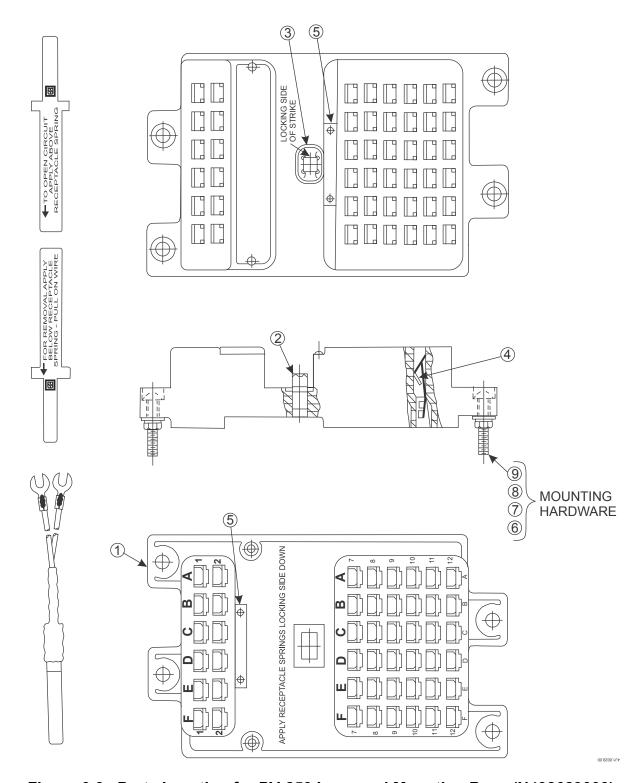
Parts Location for PV-250 Improved Mounting Base (N438689003)
